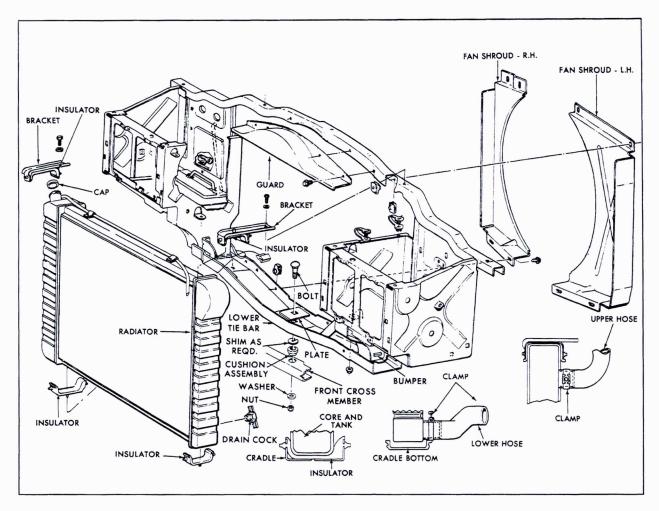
Eldorado Radiator and Cradle Assy.
